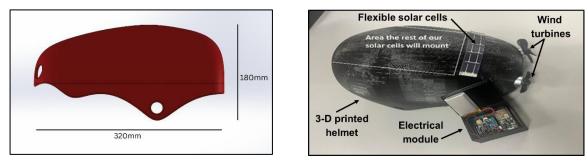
(a) SolidWorks Helmet CAD model, (b) 3-D printed helmet showing mounted wind turbines, solar cells and electrical module.
